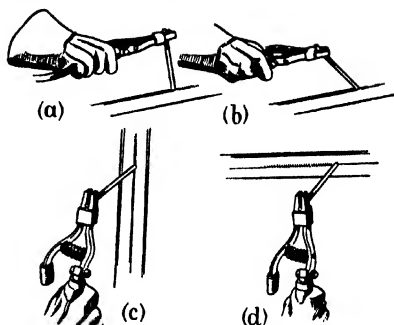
ILLUSTRATING THE CORRECT (a, c, AND d) AND INCORRECT METHODS (b) OF MANIPULATING THE WELDING ELECTRODE
